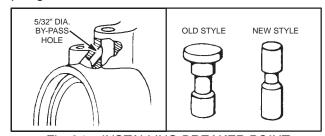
INSTALLING BREAKER POINT BUSHING
